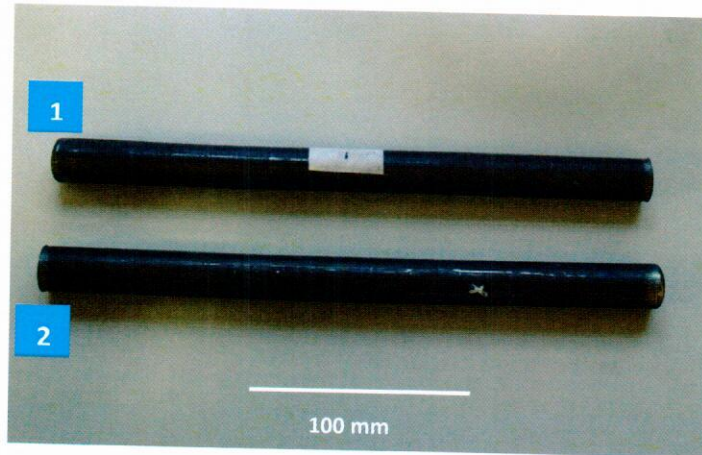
Delivered testing specimens for bend test (designated 1) and tensile test (designated 2)
